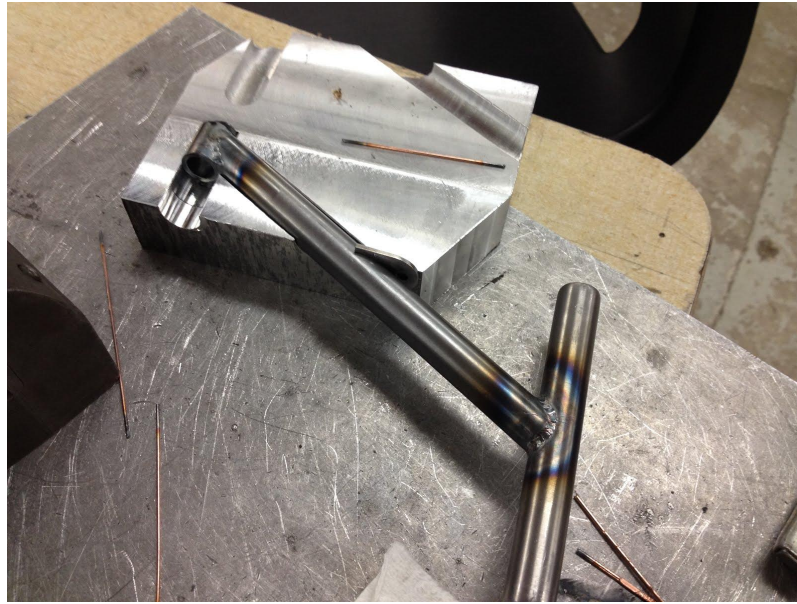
Throttle pedal welding fixture with throttle pedal in place
